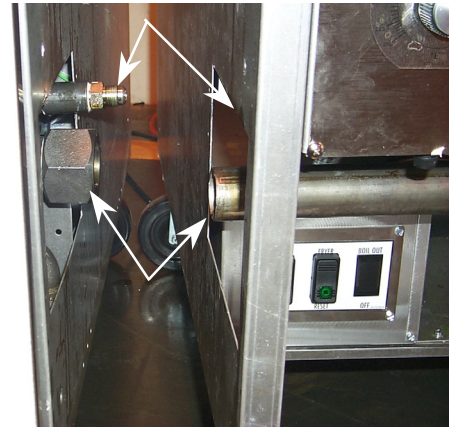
Remove slip-nut fitting on left cabinet drain-tee and install on drainpipe prior to connecting cabinets (Fig. 4).
